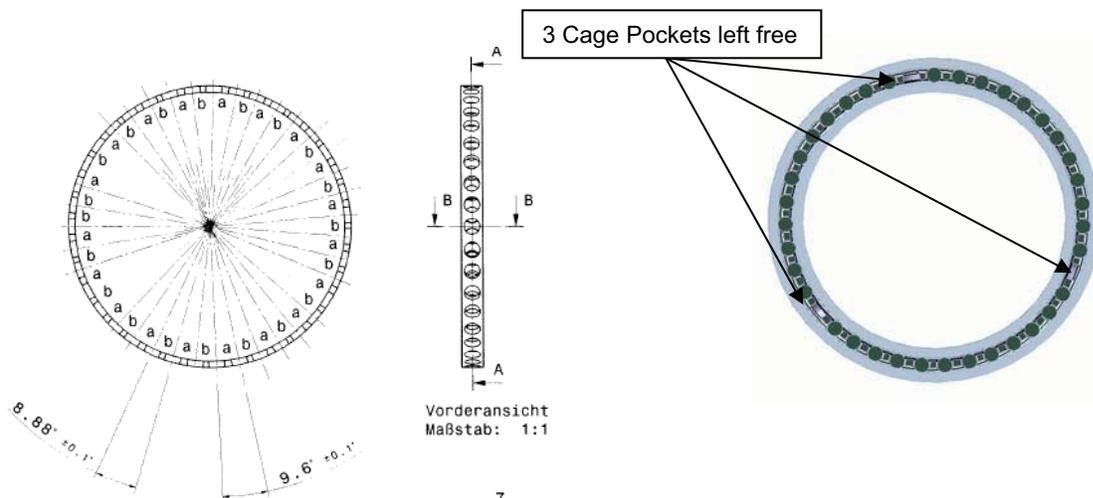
Bearing cage configuration and final bearing configuration using 36 balls only
